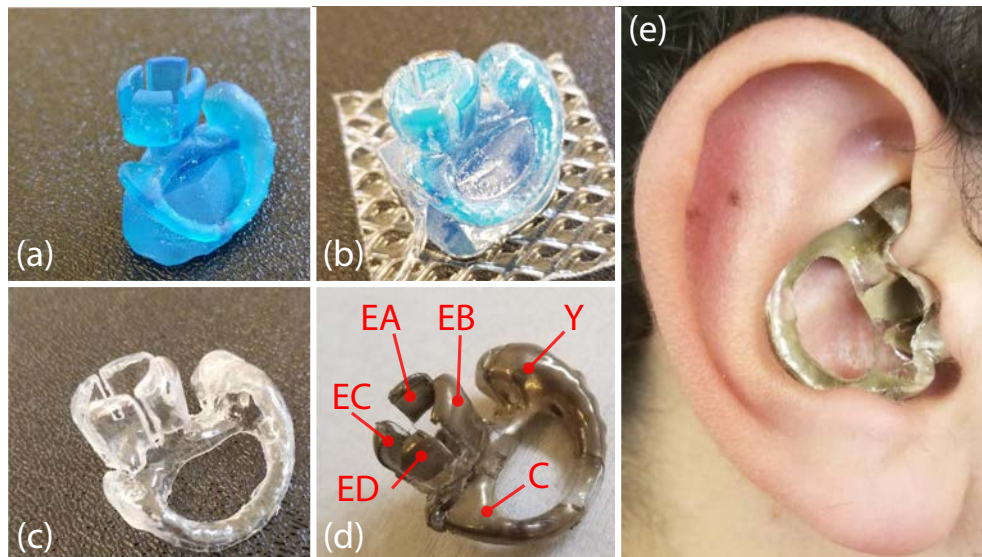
Earpiece construction and in-ear fit. (a) 3D printed master mold. (b) Thermoformed earpiece. (c) Liberated earpiece. (d) Spray-coated earpiece. (e) Earpiece in-ear fit
